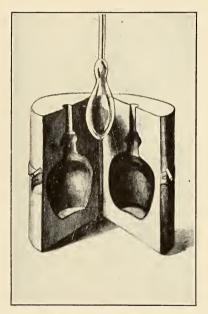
Mold for blowing glass bottles. The blow-pipe with molten glass is shown hanging within the opened mold.
